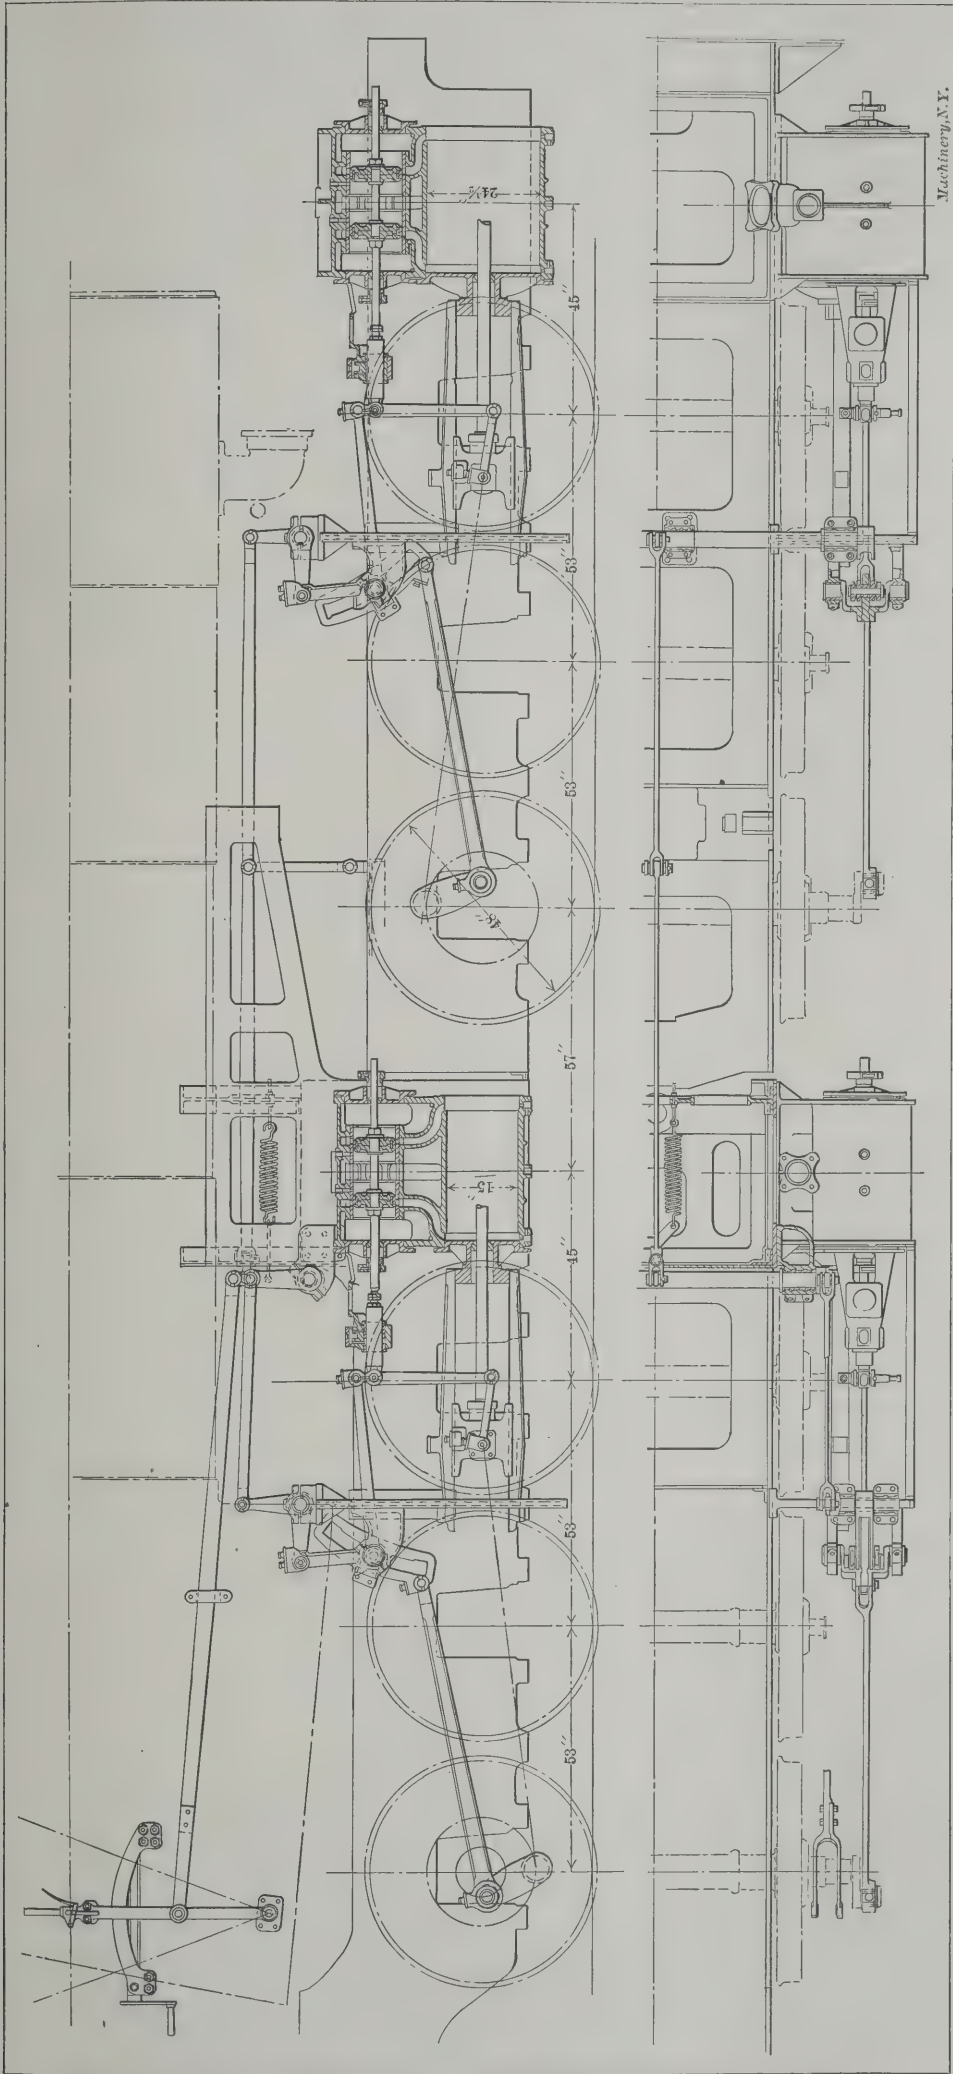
Plan and Elevation showing the Heusinger Valve Gear, which is Similar to the Walschaerts Type
